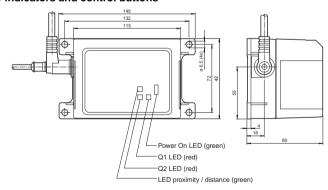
Dimensional drawing VDM54-6000-R/20/105
